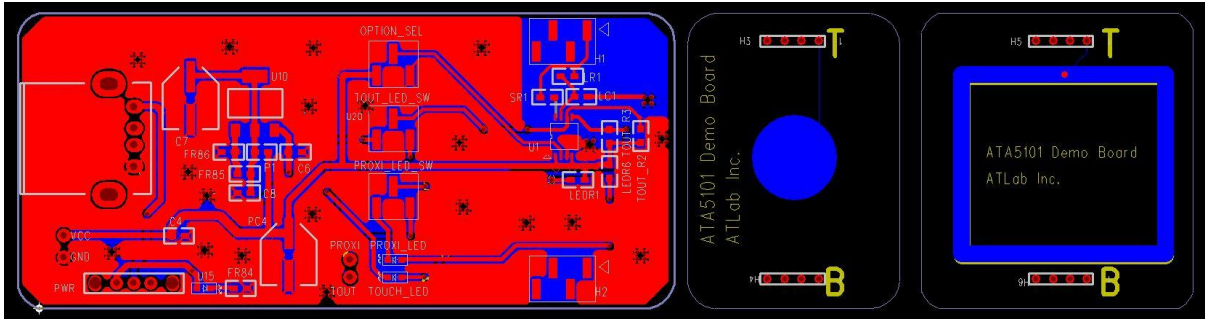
ATA5101 Demo Set PCB Layout (Top Layer)
